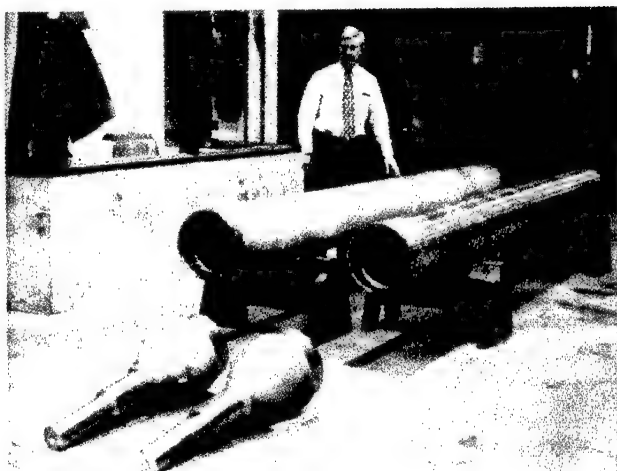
Fabricated transfer-roll assembly for operational trials in heat-treating furnaces.
